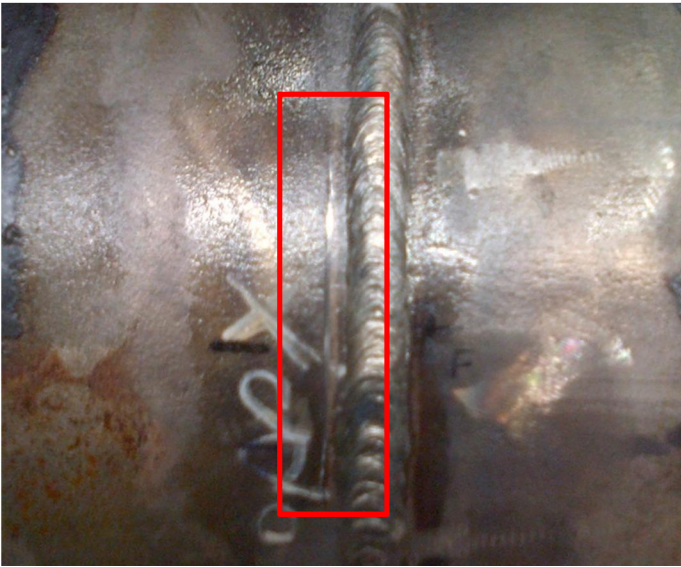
Flaw of 50 mm length and 1.7 mm depth machined into the heat affected zone
